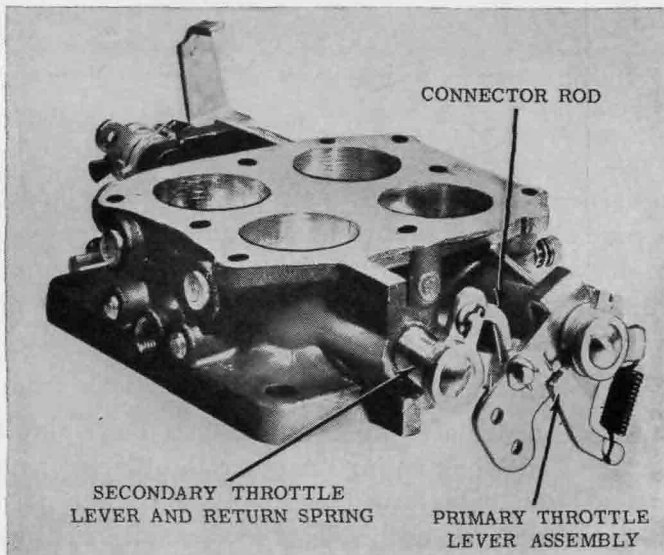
Throttle-body-lever details. (Oldsmobile Division of General Motors Corporation)
